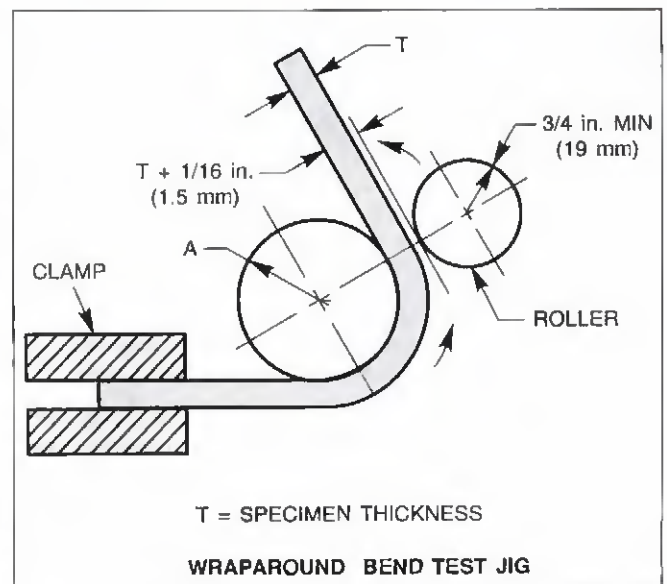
The mechanism for the wraparound bend test fixture, the preferred method of bend testing aluminum weldments. The "A" dimension shown on the drawing will vary depending on plate thickness and base metal/filler metal being tested.
